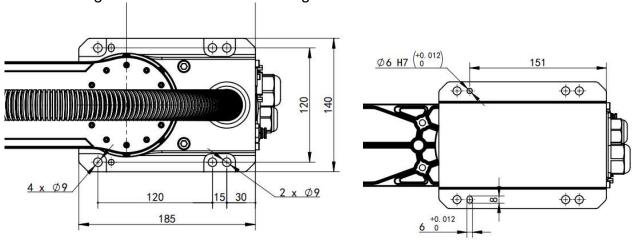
Mounting Dimensions of GBT-S3A Robot
